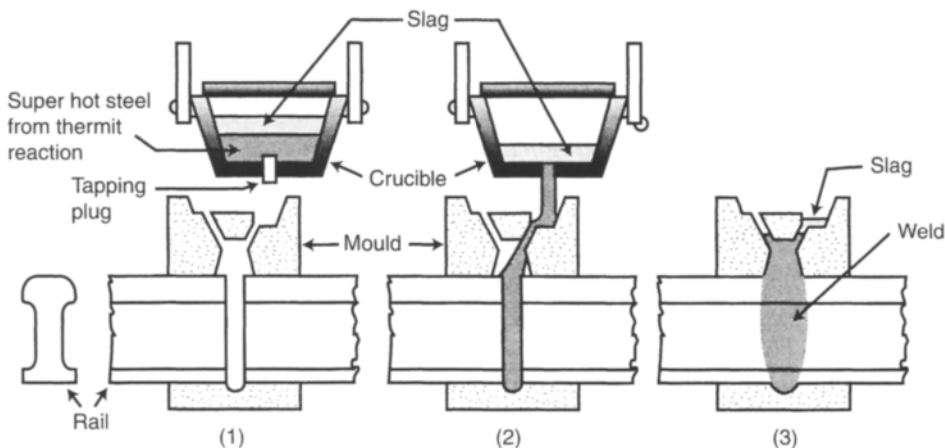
Sequence of thermit welding of railway track. (1) Steel from thermit reaction ready to pour, (2) pouring of steel into temporary mould, and (3) cooling of welded joint prior to removal of temporary mould and grinding.
